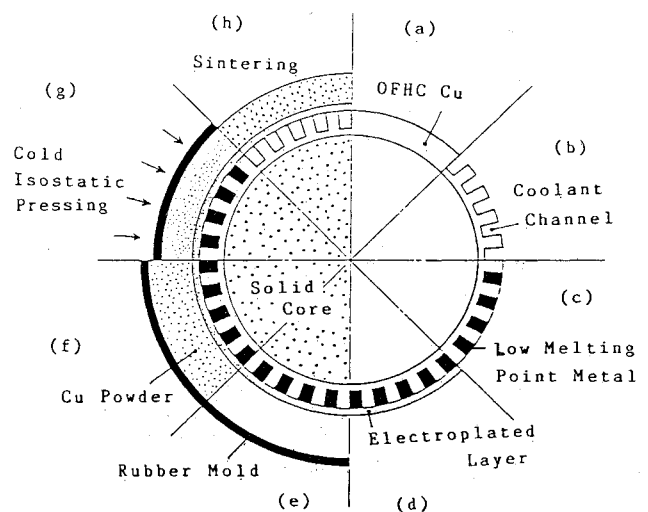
Fabrication sequence for CIP-formed thrust chamber.
